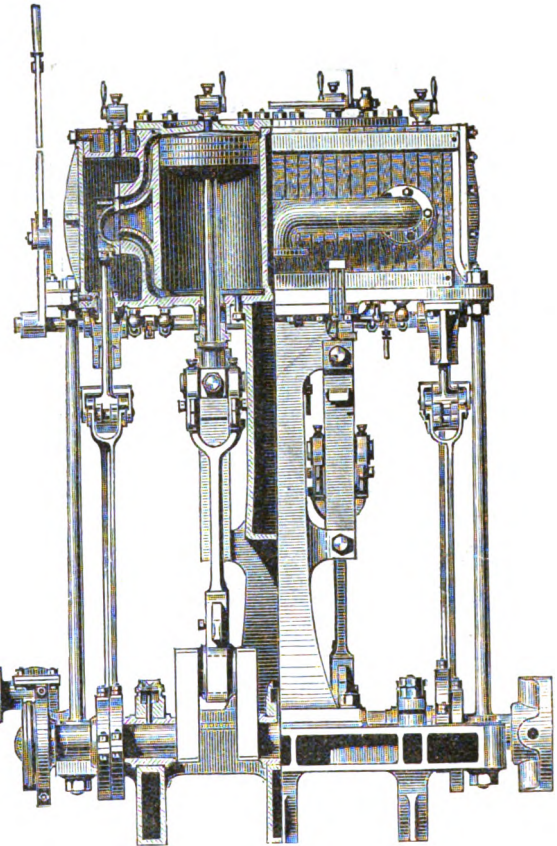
is the end elevation, and Fig. 37 the side elevation, partly shown in section, of our Double-Cylinder Screw Engines, 14 inches diameter, and 18 inches stroke. We make all our Double-Cylinder Engines above 8 inches diameter on this design, which is of the most substantial description—as will be seen from the woodcuts: the general arrangement is somewhat similar to our usual pattern, except in regard to the framing. This consists of a central standard of massive design, and cast hollow to give great stiffness, to which the guide bars are attached on each side by means of projecting lugs. The base of this standard where it rests on the bed plate extends beyond the centre line of the cylinders, and in addition, the outer corners of the cylinders are supported by four turned wrought-iron stanchions or pillars, thus securing a framework of great rigidity combined with lightness, while every part of both Engines is perfectly accessible for the purpose of necessary adjustment. As shown in the woodcut, the reversing lever has been carried upwards so as to be worked from the deck, but it is always arranged to be worked from level of bed plate unless otherwise ordered. The other details are very similar in design to those already described, our chief care being to have all parts made so as to endure hard work. For Prices of these Engines, see our Tabular Price List, pages 36 and 37.
